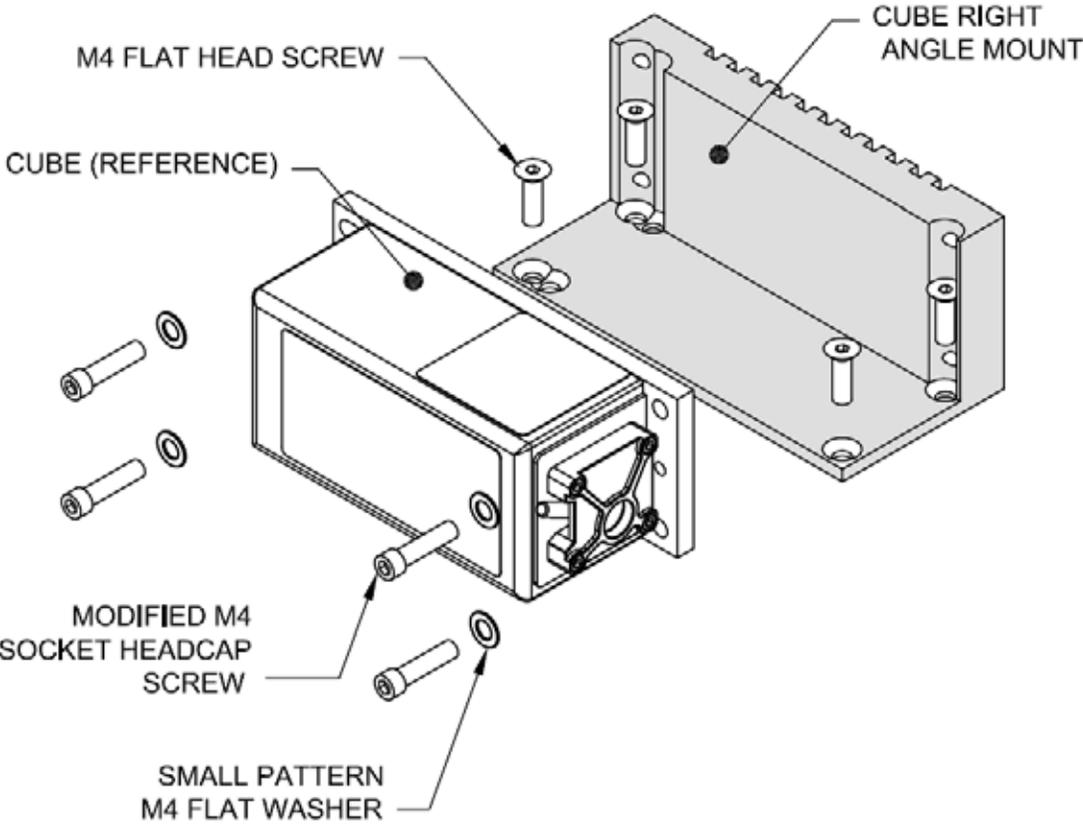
Right-Angle Heat Sink Mount Mounting Diagram
